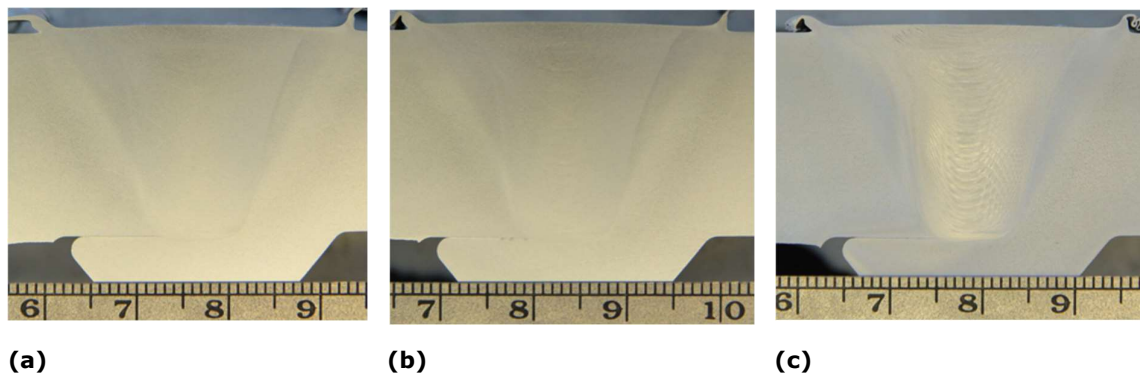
0_Gap_23mm weld macrography at (a) start, (b) middle, and (c) end
